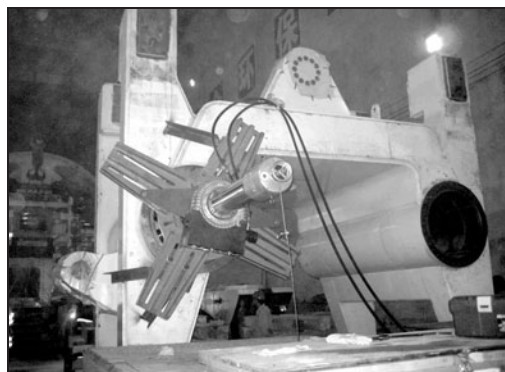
Pre-assembly of the cutterhead support and shields—Jin Ping II, China
